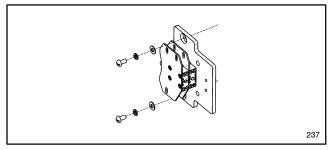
Coil Control Contact Kit (with mounting hardware)
